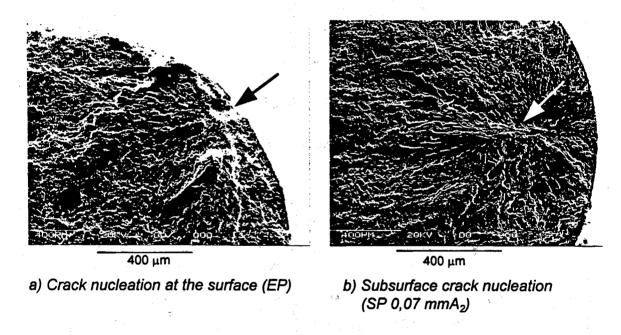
Fracture surfaces (SEM) of LF in axial loading (σ_a = 750 MPa)
